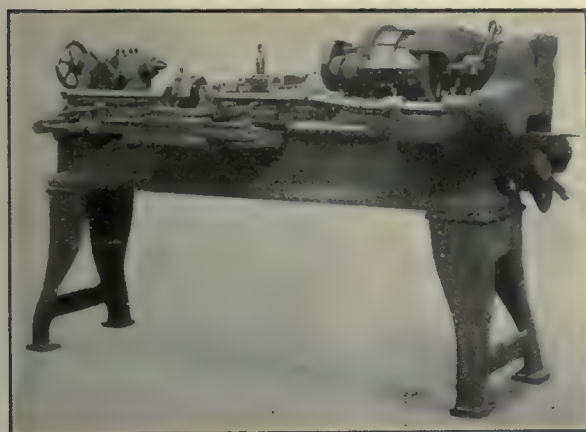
Lodge & Shipley Lathe Fitted with the Derrer Attachment for Turning and Boring Ovals and Multi-Lobe Shapes.
